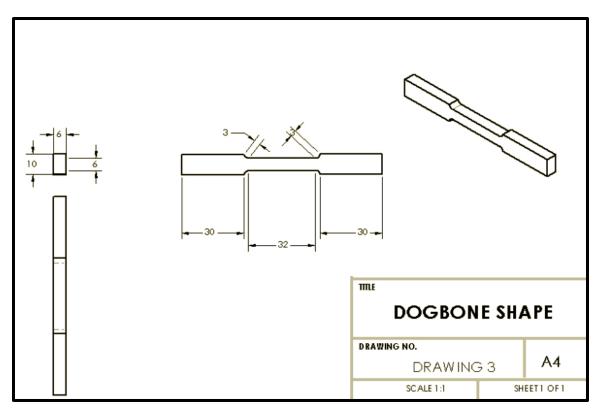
Dog bone shape specimen design using Solid Work Software.
